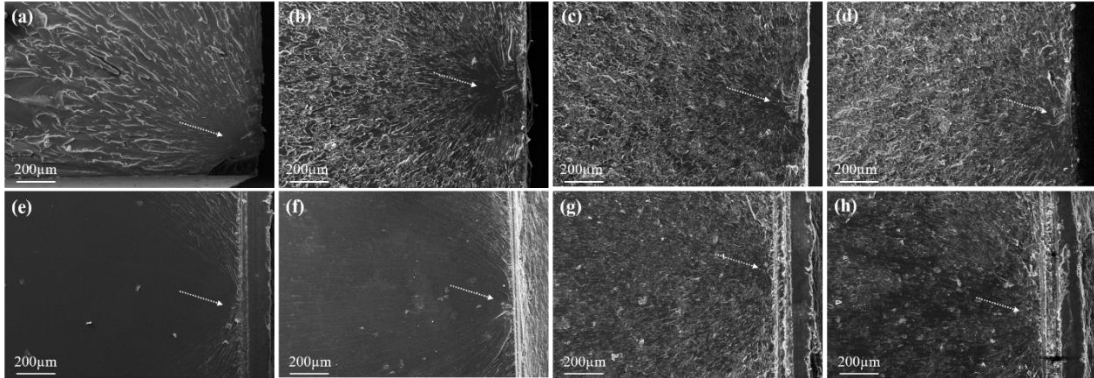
10. Fracture morphology: (a-d) tensile specimen, (e-h) SENB specimen.
